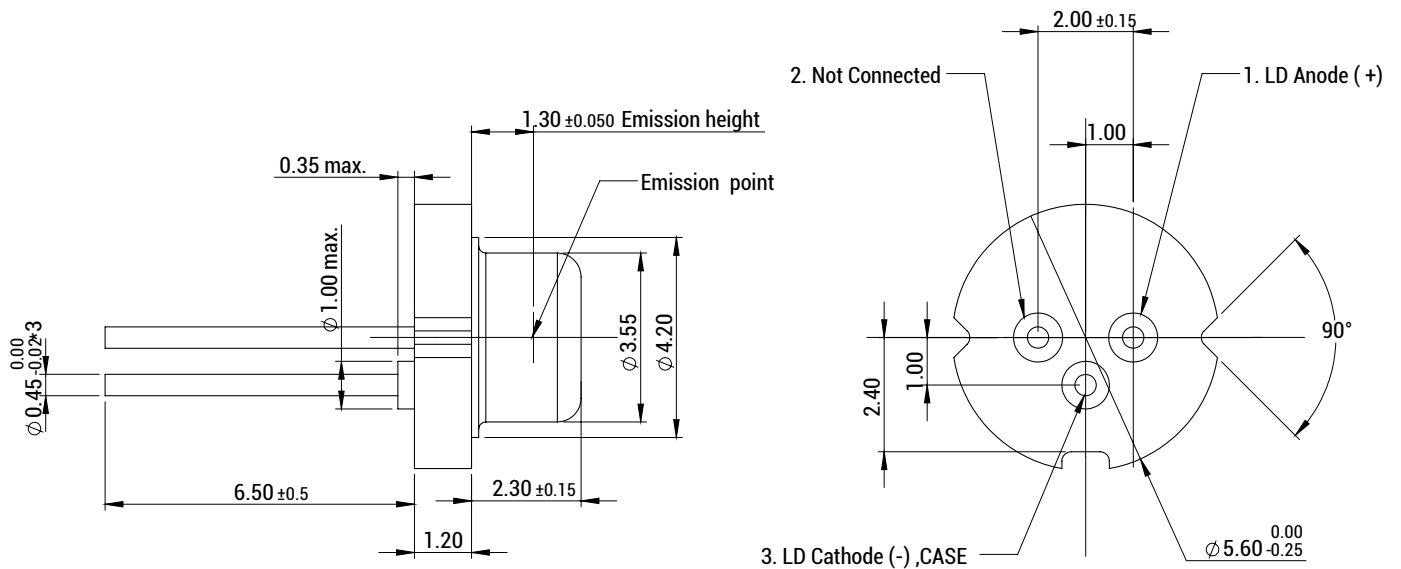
Technical drawing of TO-56 package including dimensions left: side view, right: bottom view, General Tolerance +/- 0.1 mm, Lead finish Au
